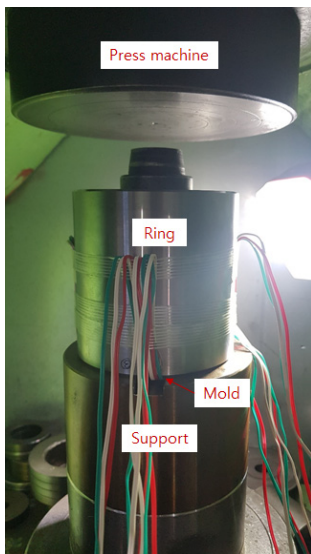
Photograph of press-fitting for fastening the mold to the ring
